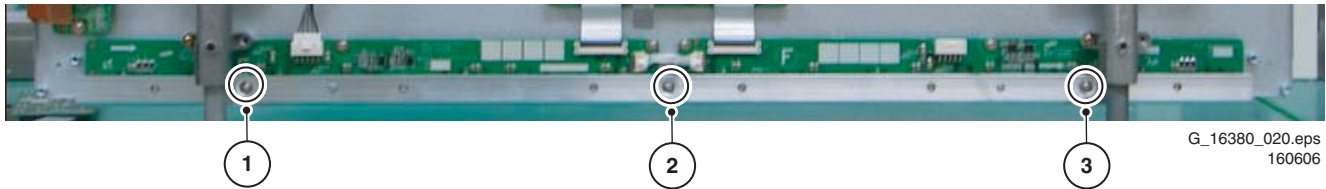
Photo 1 - Heatsink 42" SD v5
